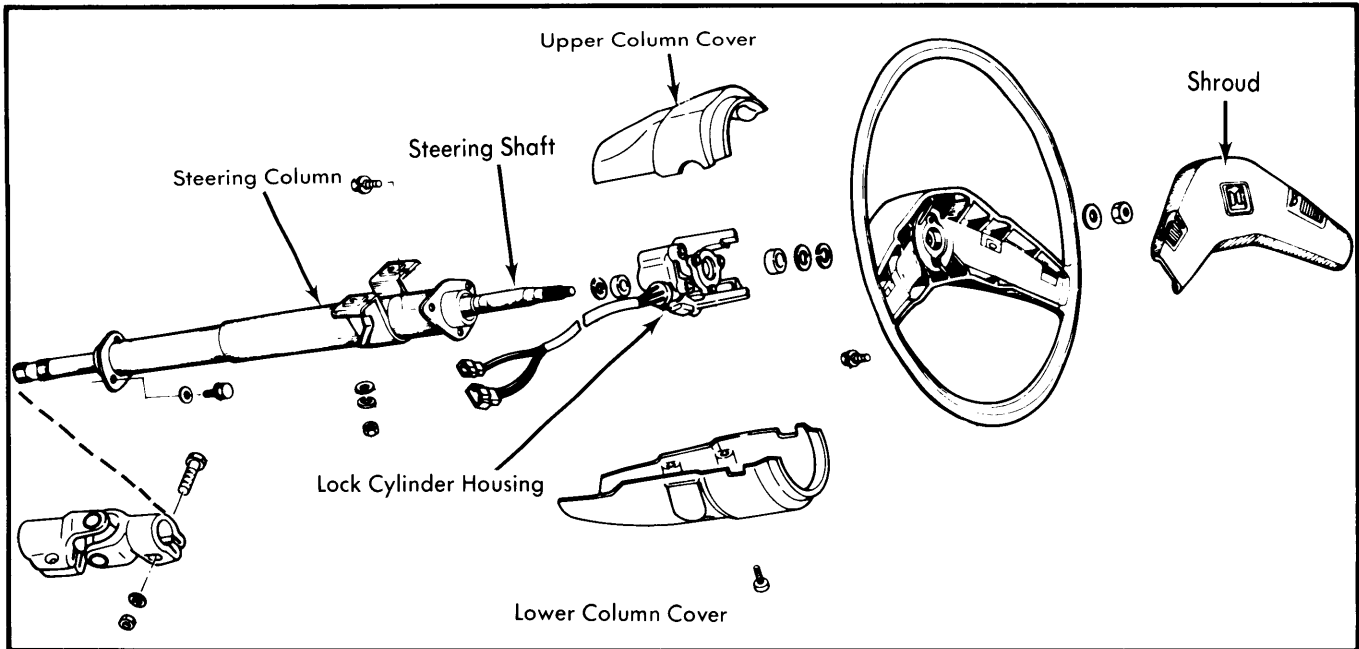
I-Mark Steering Wheel Assembly (P'UP Similar)
